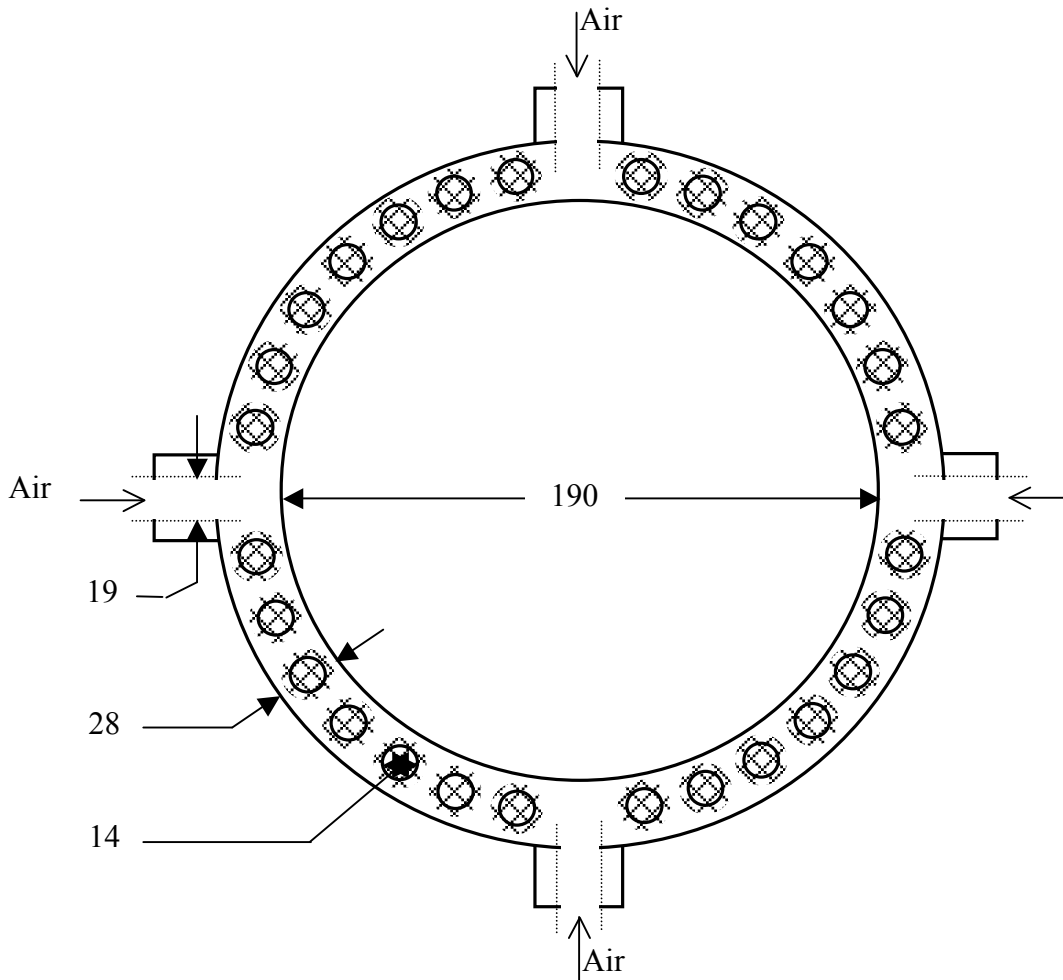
Air sparger ring used in the experimental stripper. All dimensions in mm.
